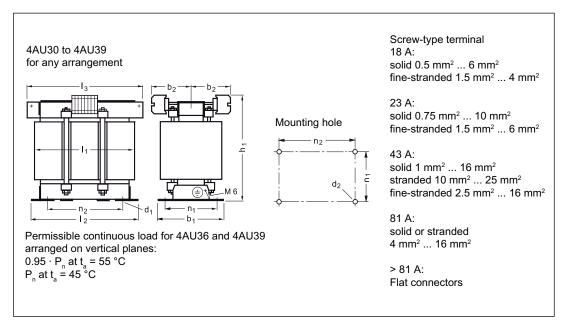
Dimension drawing for 4AU30 to 4AU39 transformers
